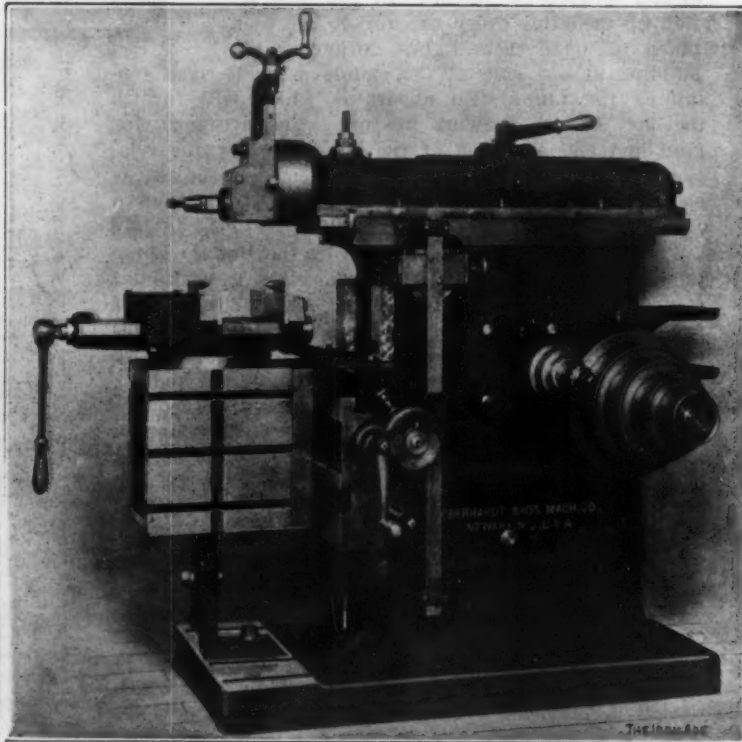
Side View, Showing the Unique Feeding Mechanism.
